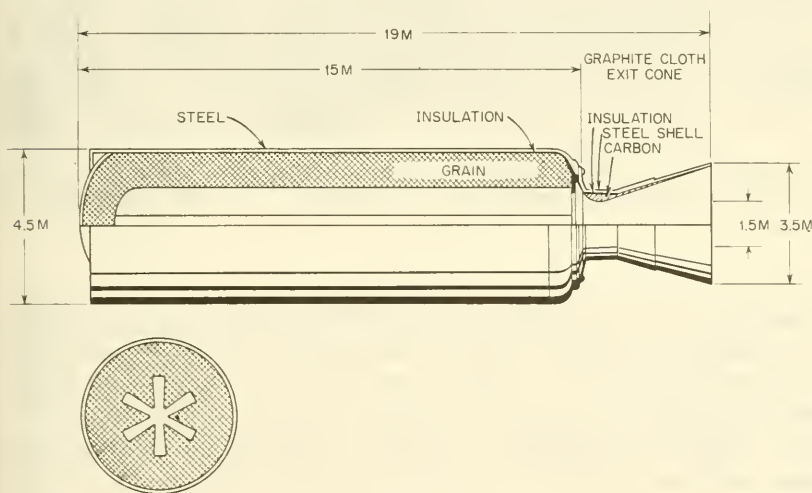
Drawing of a large solid-chemical rocket motor. The thrust of a motor of this size would be about 500 000 kilograms.
